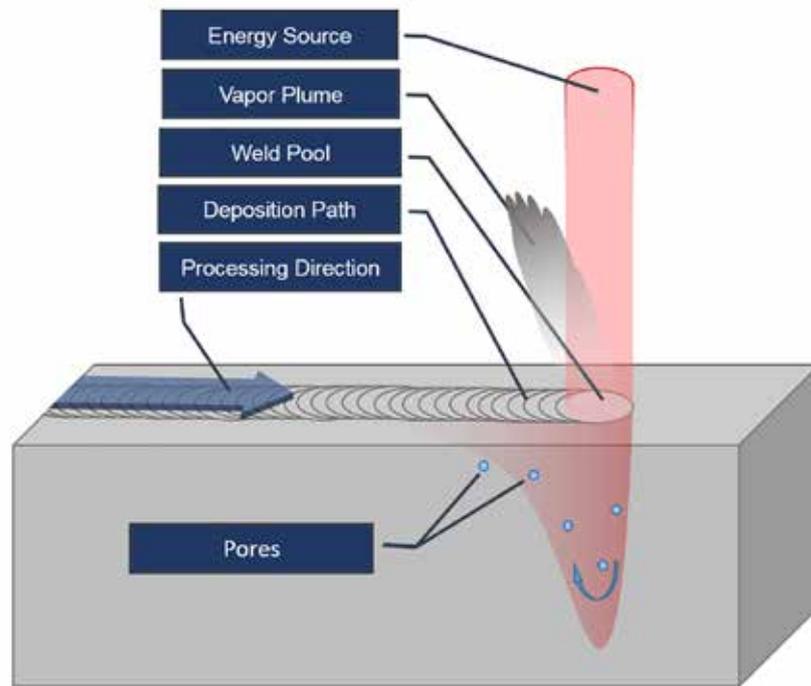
Keyhole welding arrangement, showing formation of pores
